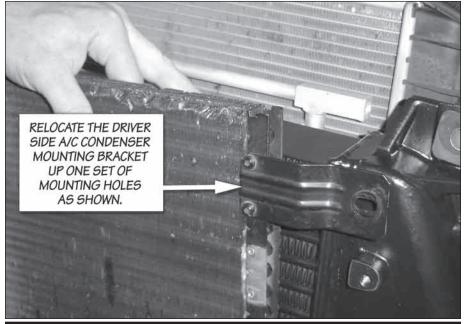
Relocation of the Upper Driver Side A/C Condenser Mounting Bracket
